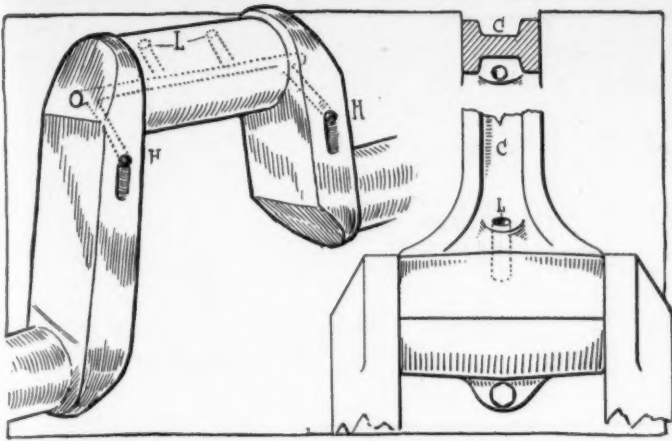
LOCOMOBILE'S DRILLED CRANKSHAFT
